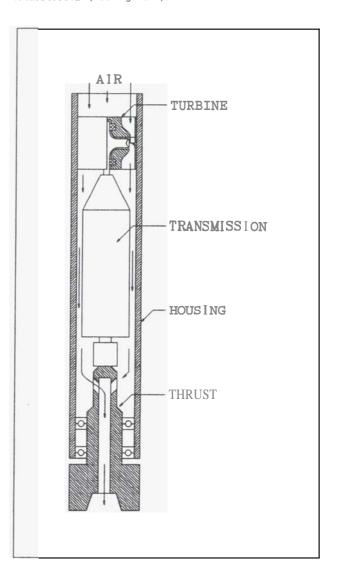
Schematic diagram of the pneumatic turbine-powered drilling machine.
